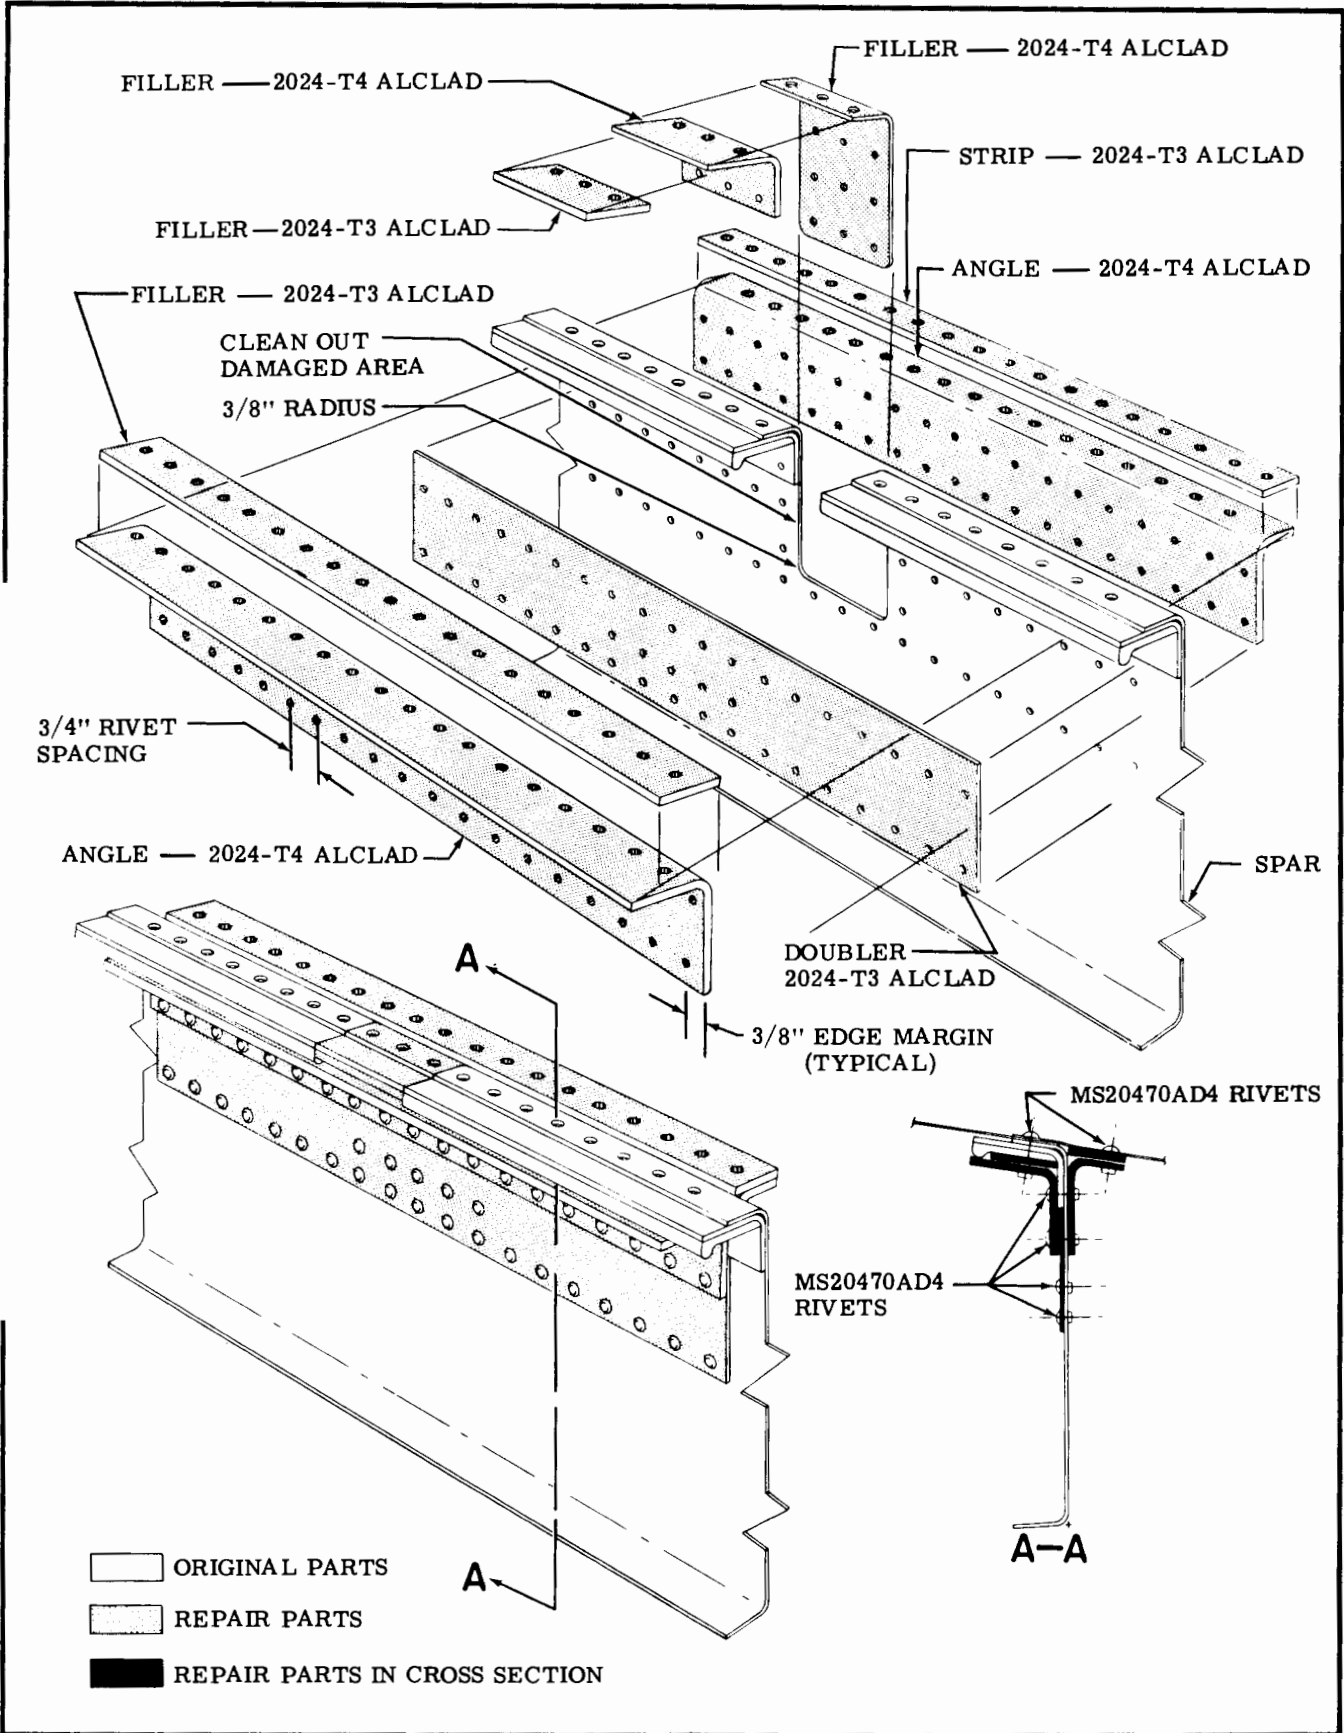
Wing Spar Repair (Sheet 1 of 4)
